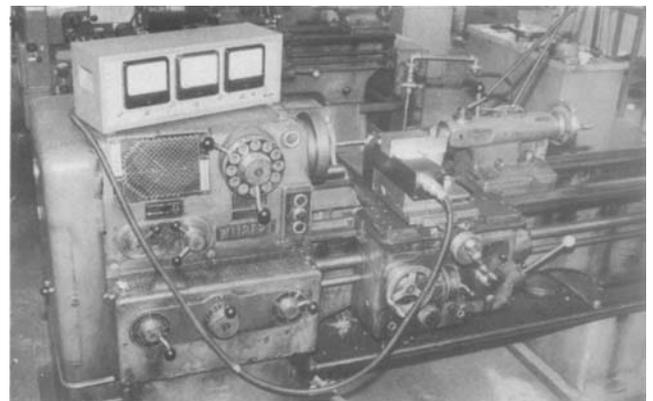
Set-up showing lathe with dynamometer used for burnishing the shafts
